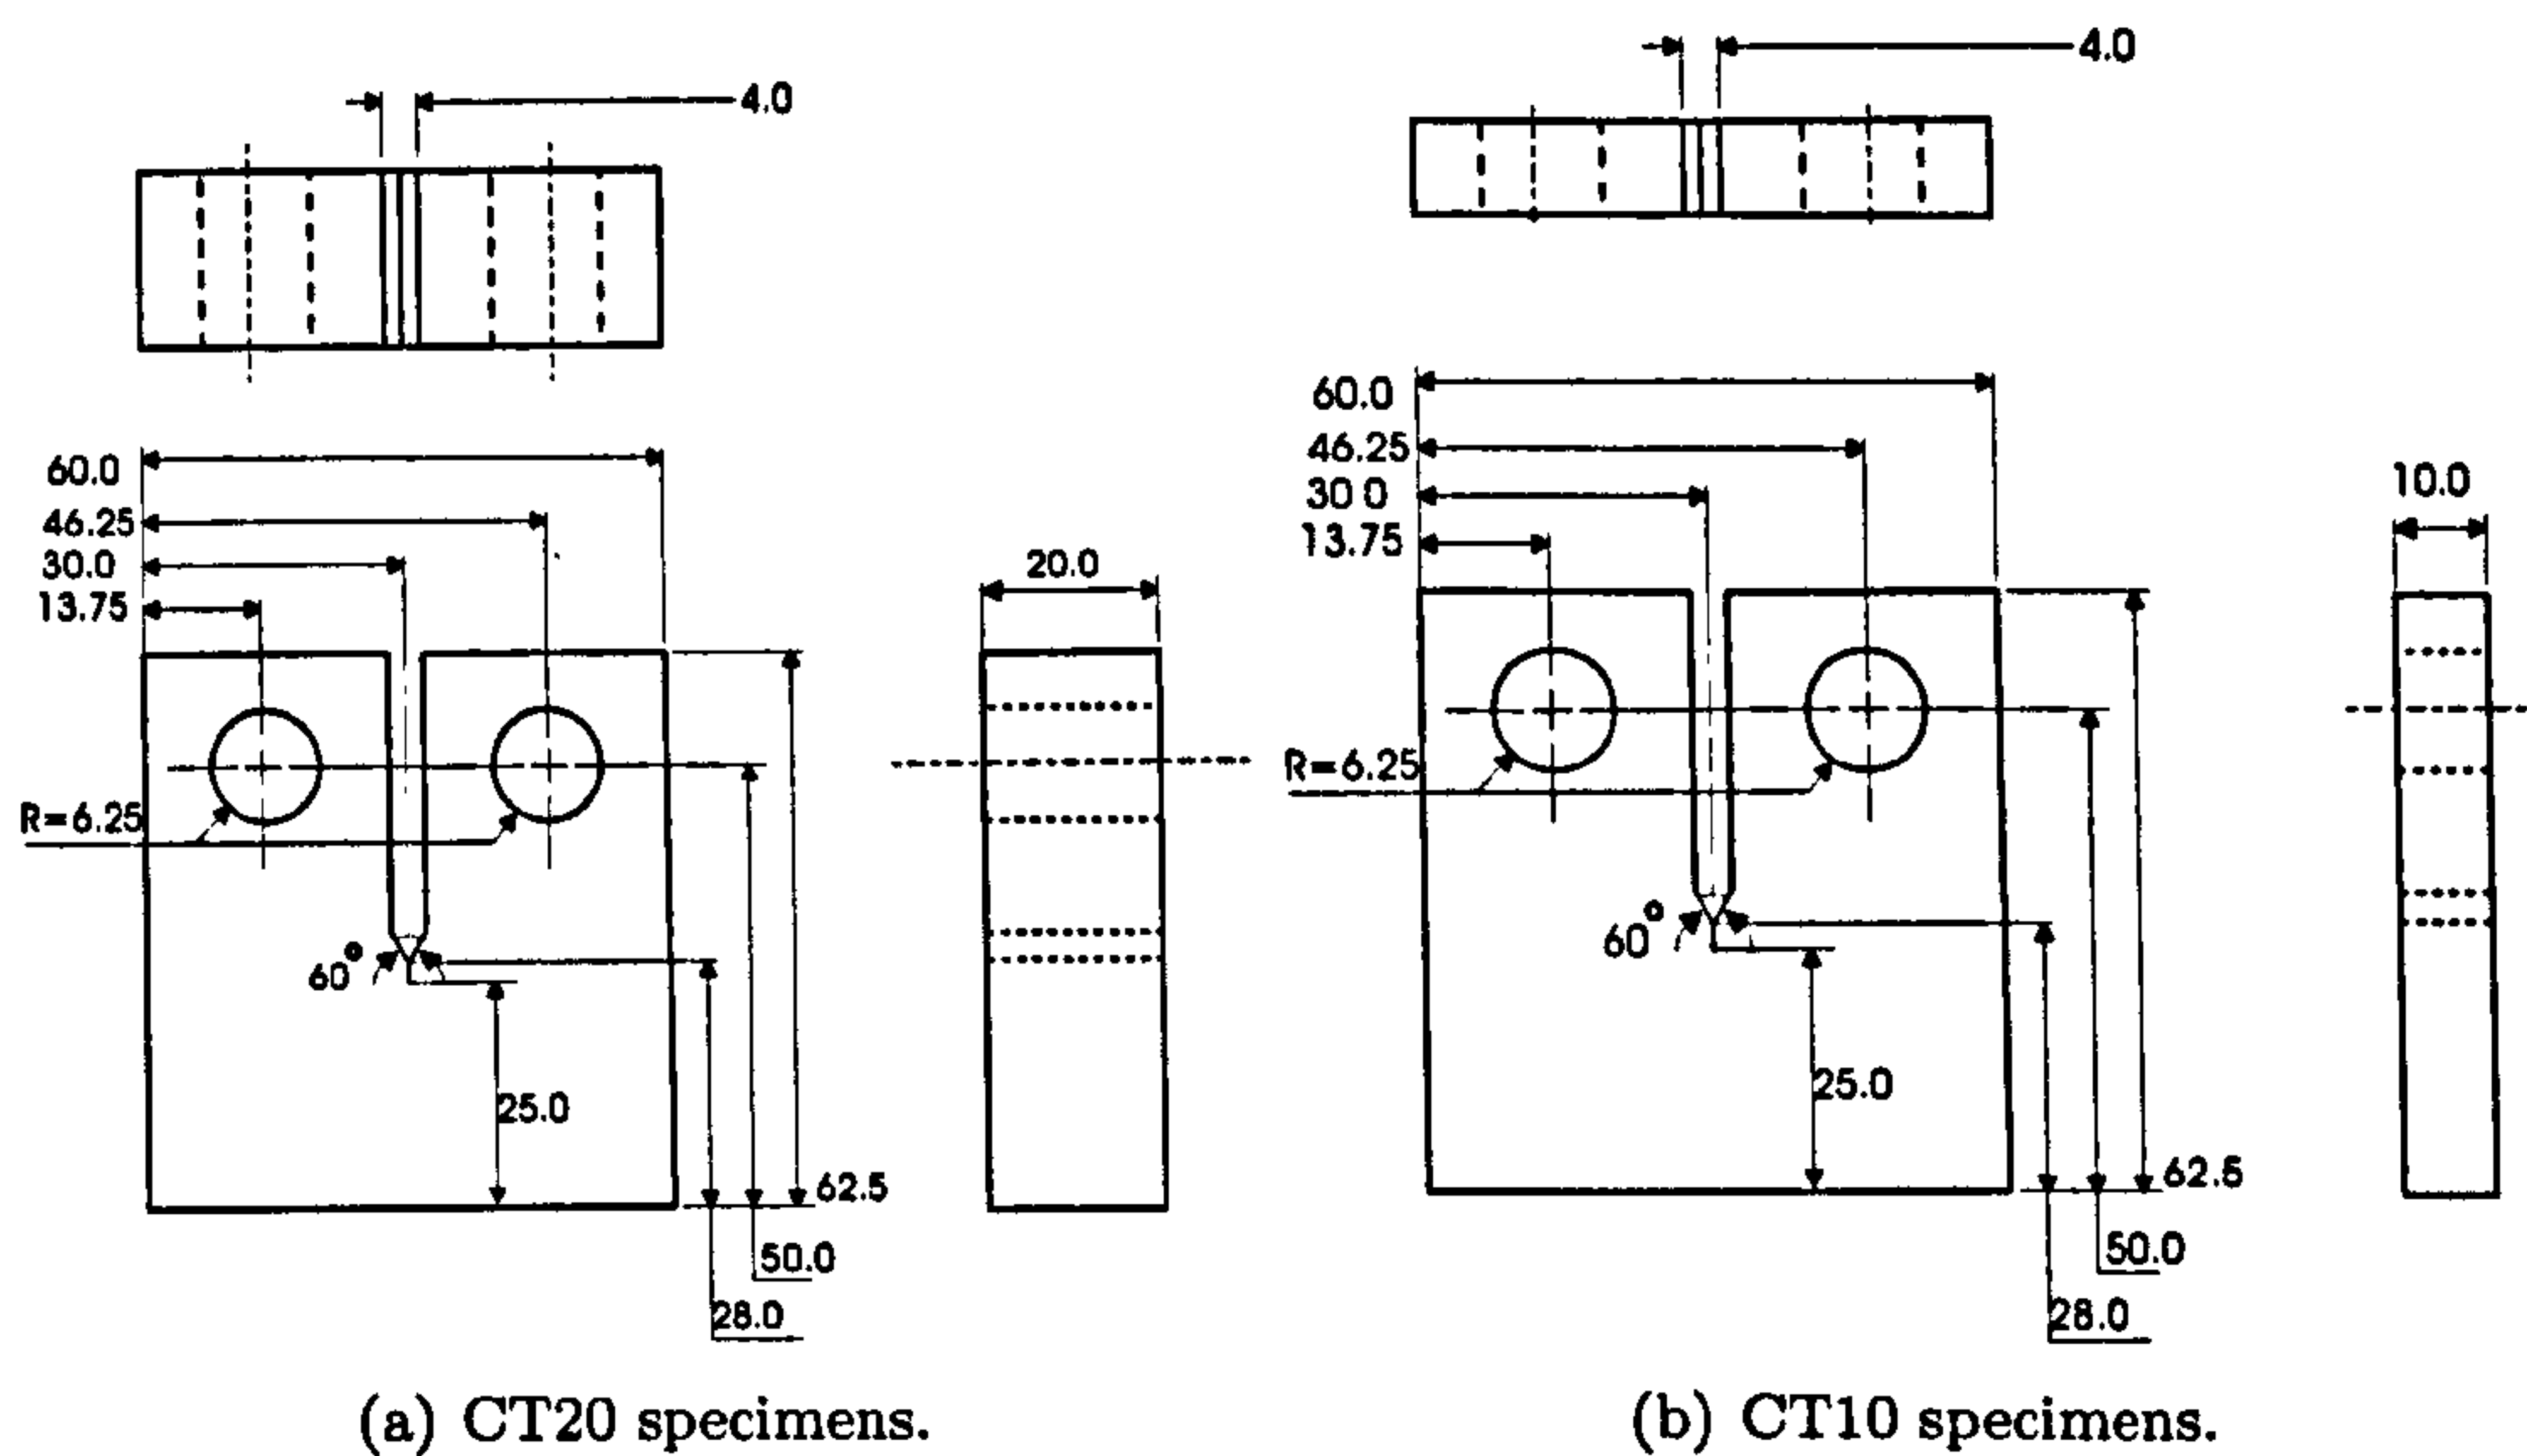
Geometry of CT specimens, dimensions in mm.
